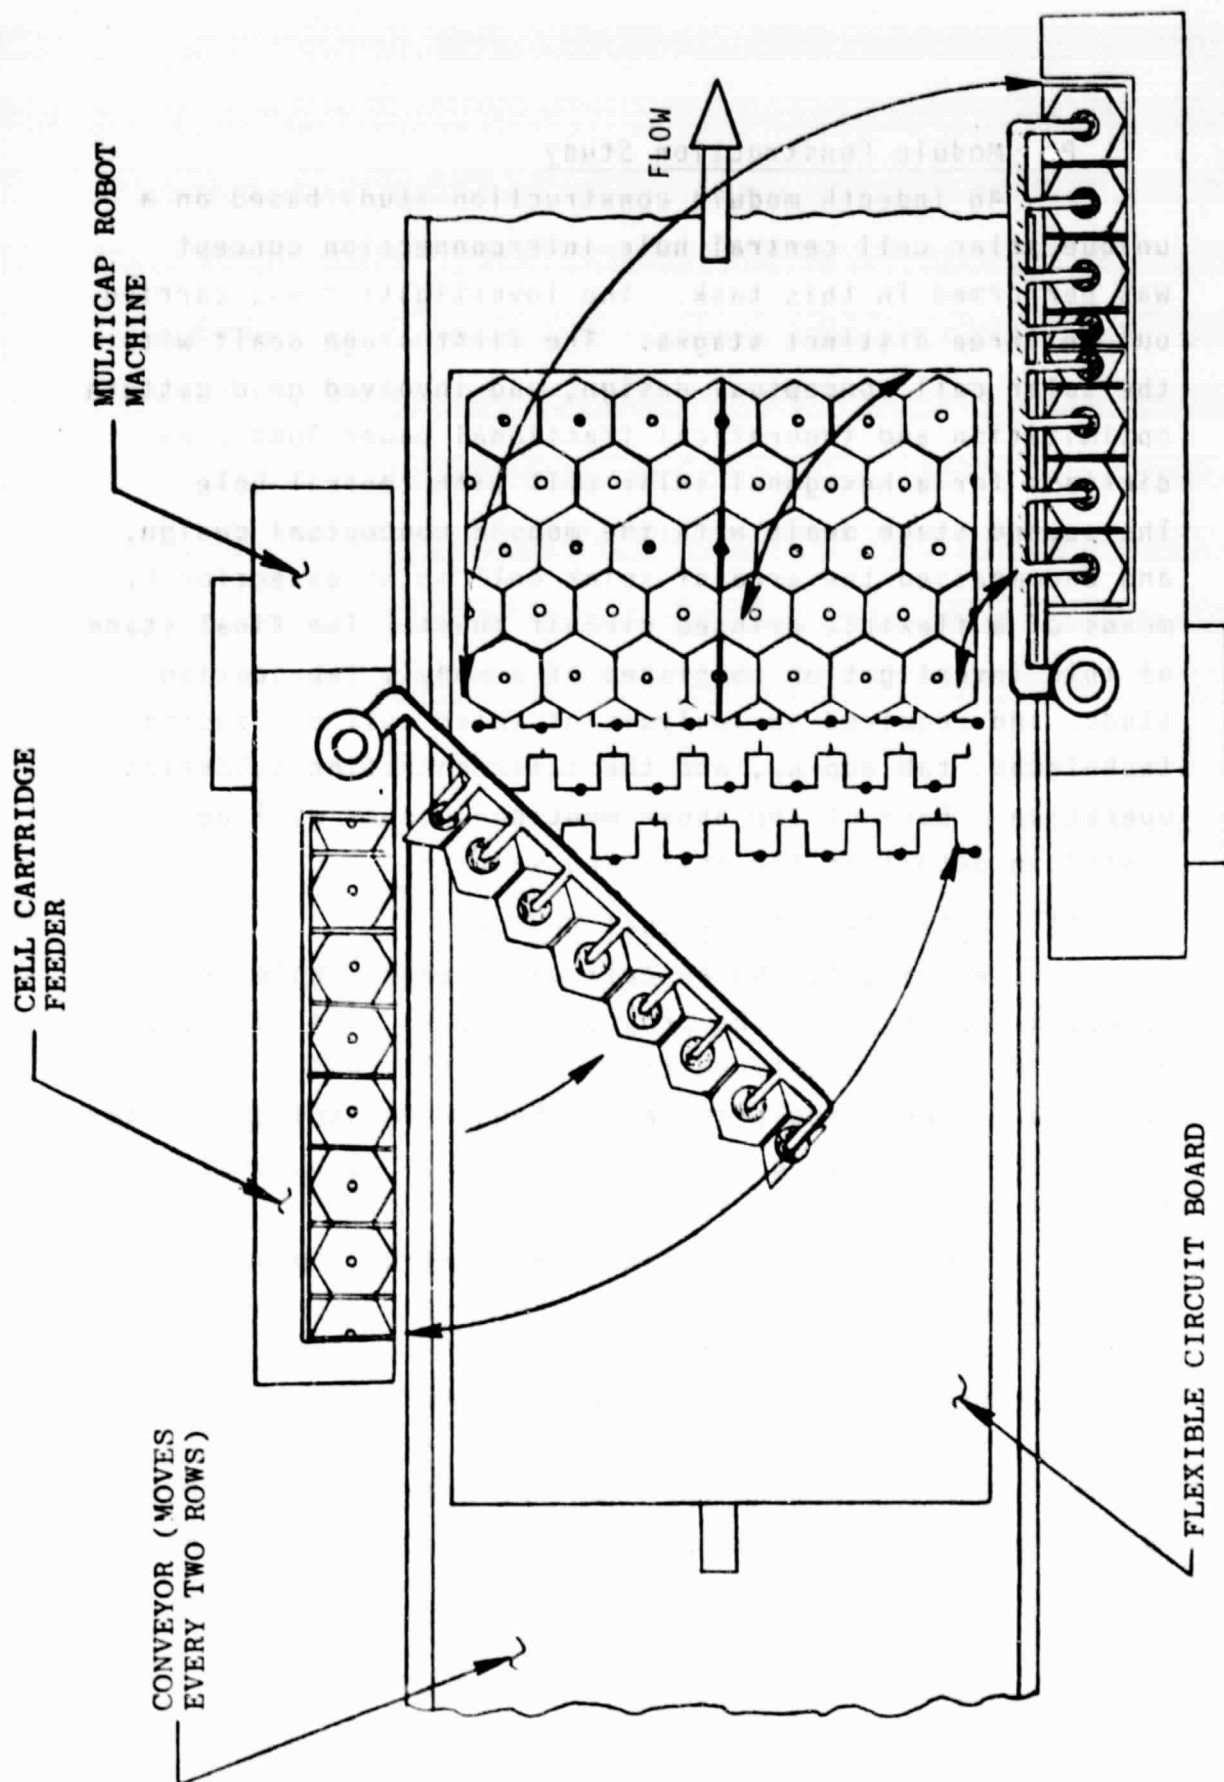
Conceptual Drawing of Cell Handling System for Automatic Module Assembly Line.
